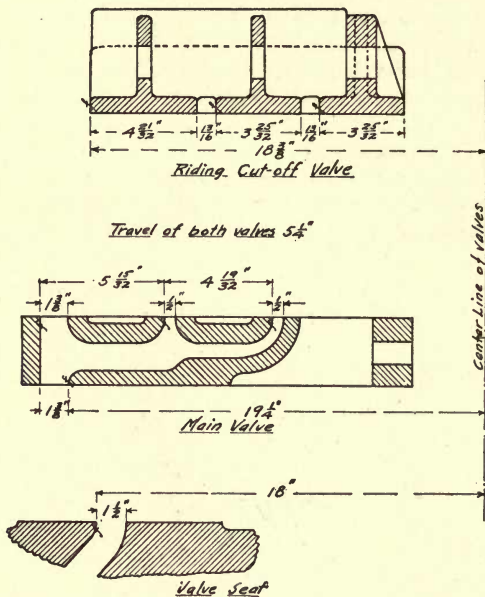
FIG. P. VALVES AND SEAT OF RUSSELL FOUR-VALVE ENGINE
